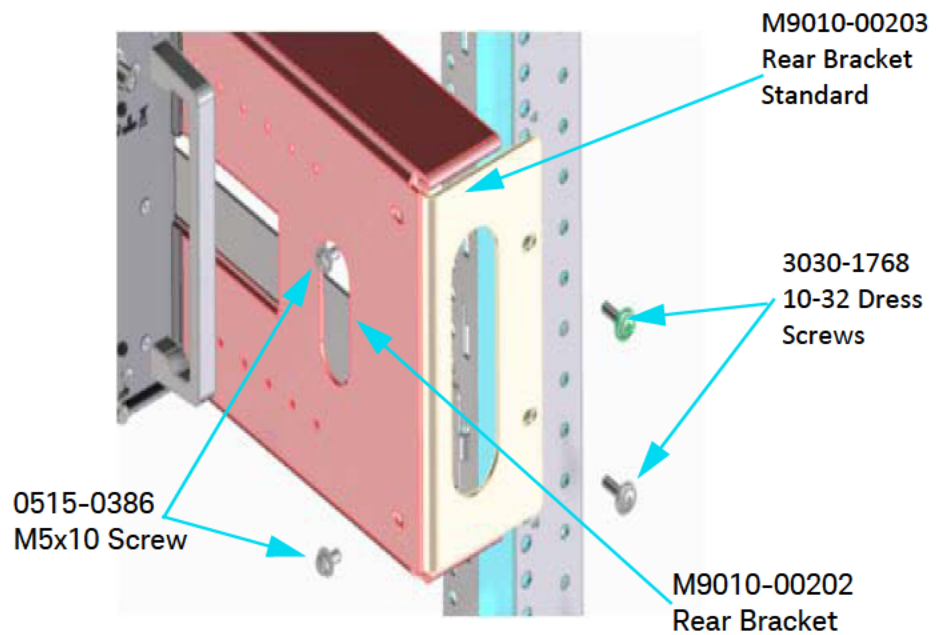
Attach Rear Bracket Standard to Rear Bracket and Rack Column
